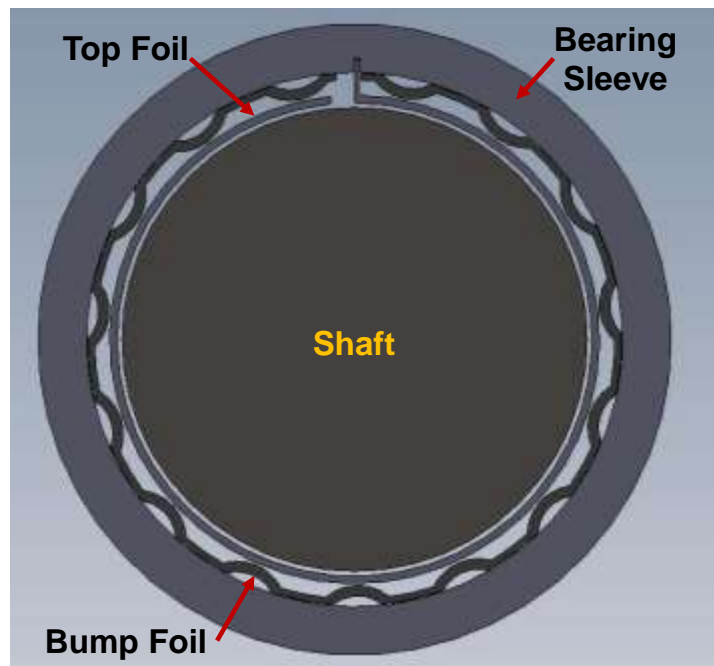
Typical foil bearing geometry for radial support (Journal Bearing)
